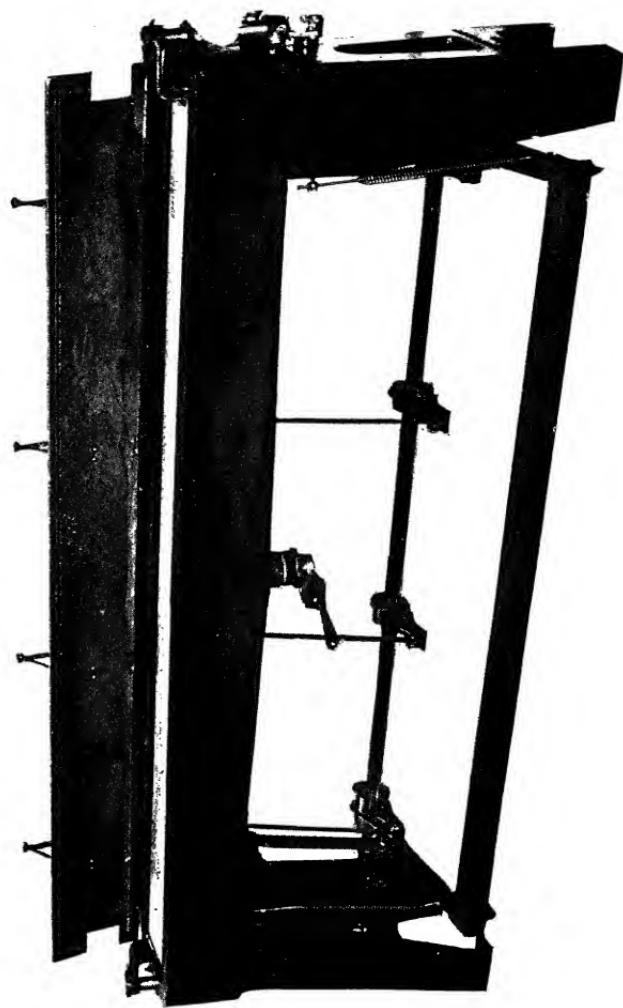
A TYPICAL EDGE GLUING MACHINE
